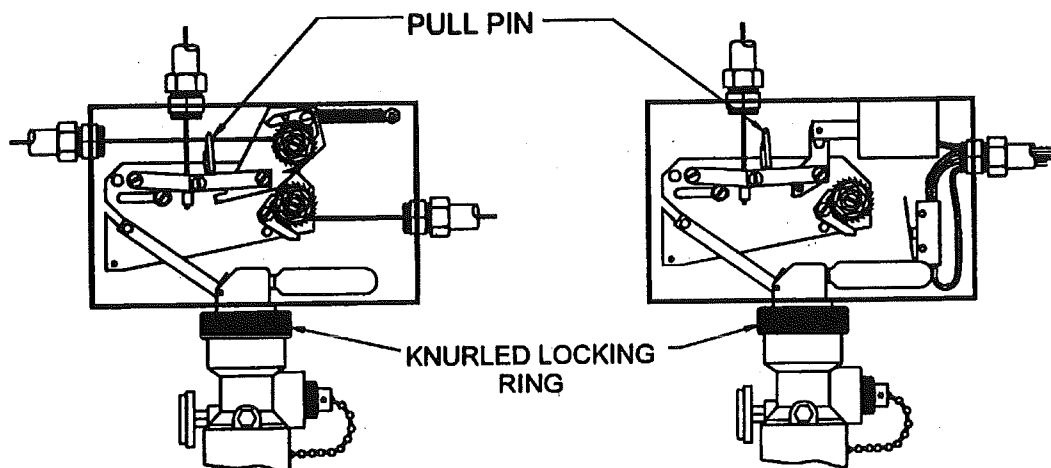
Single Cylinder Installation Using Model ECH Control Head.
